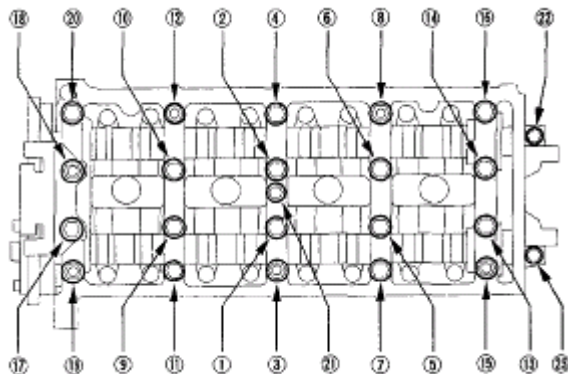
Identifying Camshaft Bolts Torque Sequence
